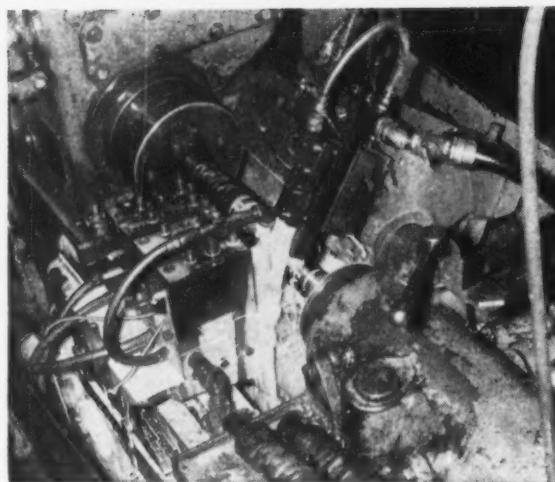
Fay automatic setup where the end to be splined and a circumferential groove are turned. Cuts are made with high speed tools at 53 sfpm.
